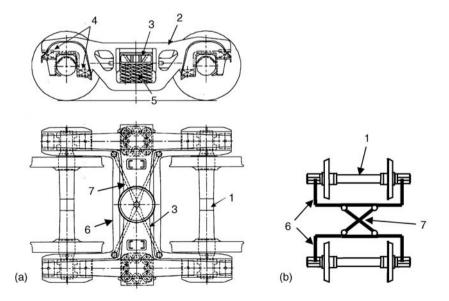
Scheffel HS bogie with diagonal linkage between wheelsets: (a) general view; (b) the principal scheme of inter-axle linkages (1, wheelset; 2, side frame; 3, bolster; 4, primary suspension; 5, secondary suspension; 6, subframe; 7, diagonal links).
